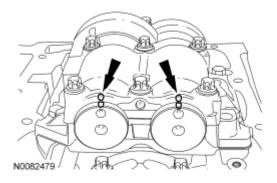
Locating Balancer Unit And Shafts Reference Mark
